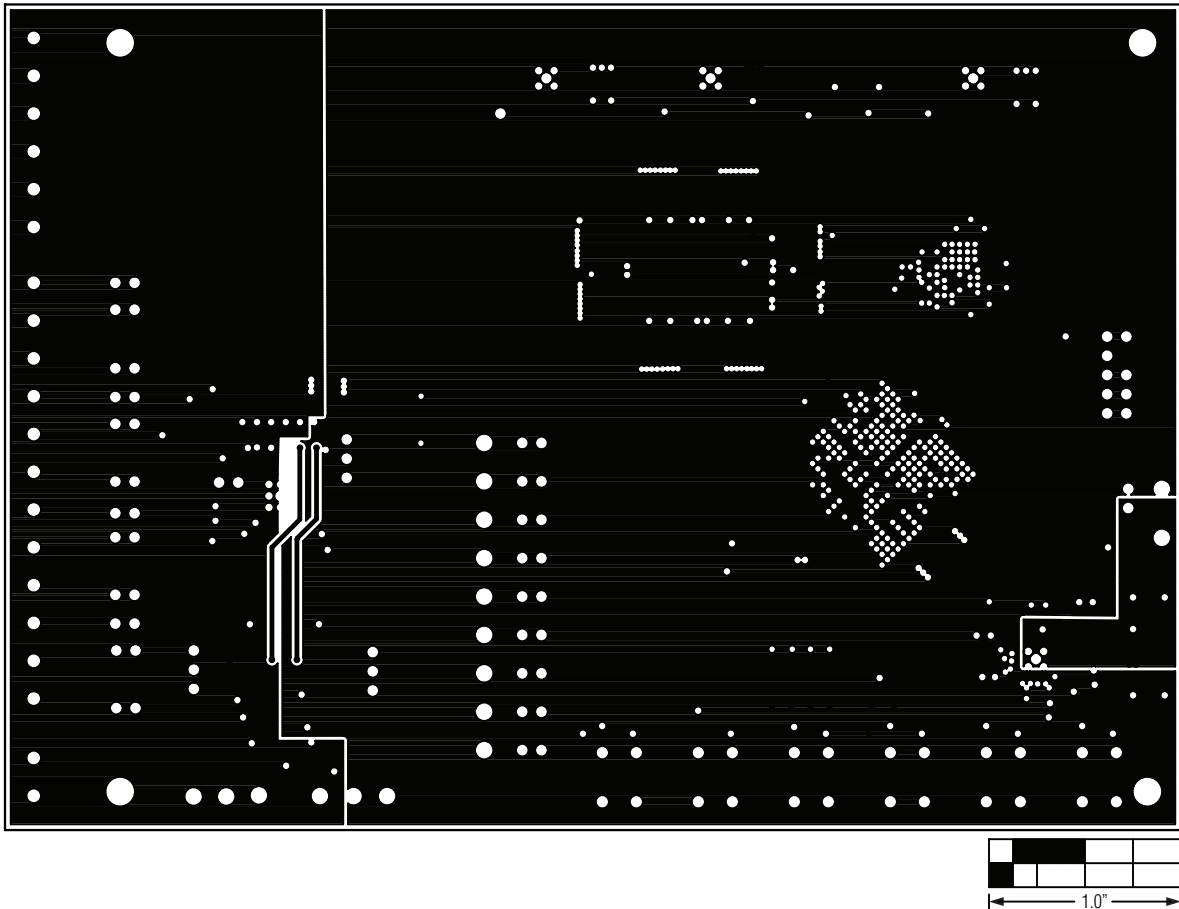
MAX11043 EV Kit PCB Layout—Ground Layer 4
